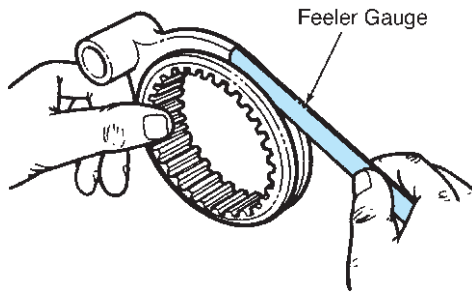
There should be a specified clearance (about 0.030 in.) between the fork and the groove in the sleeve; excess clearance indicates a worn fork or groove. (Courtesy of Ford Motor Company)
